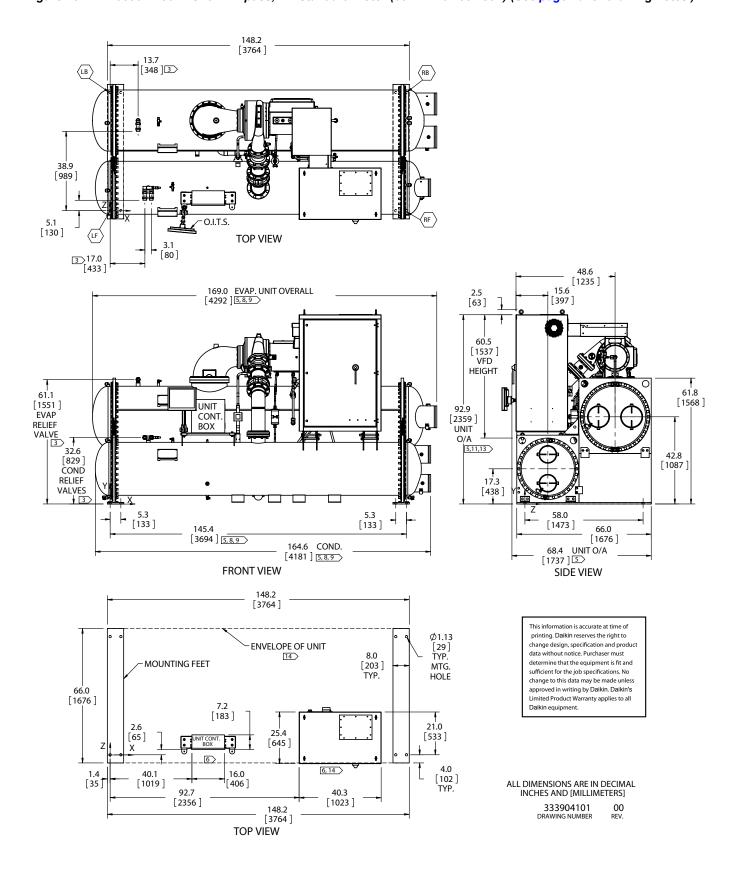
WME0500 - E3012/C2612 - 2-pass M2 Standard Motor (50Hz 380/400/415V) (60Hz 380/575V)
